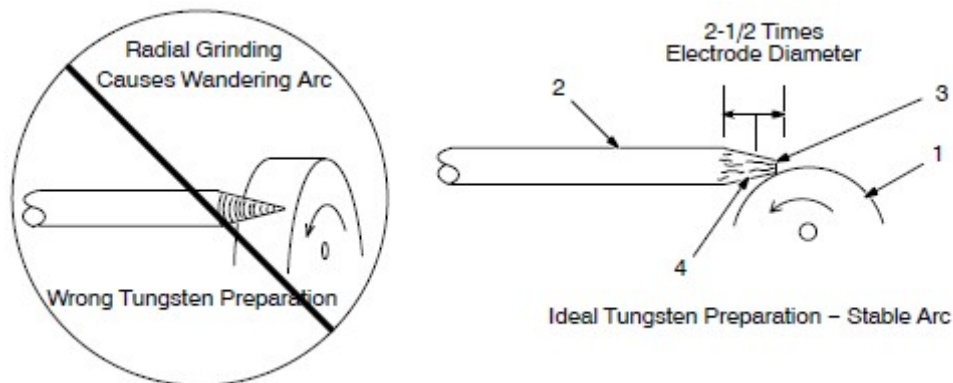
Preparing Tungsten for DC electrode negative (DCEN) welding or AC welding with inverter machines [59]
